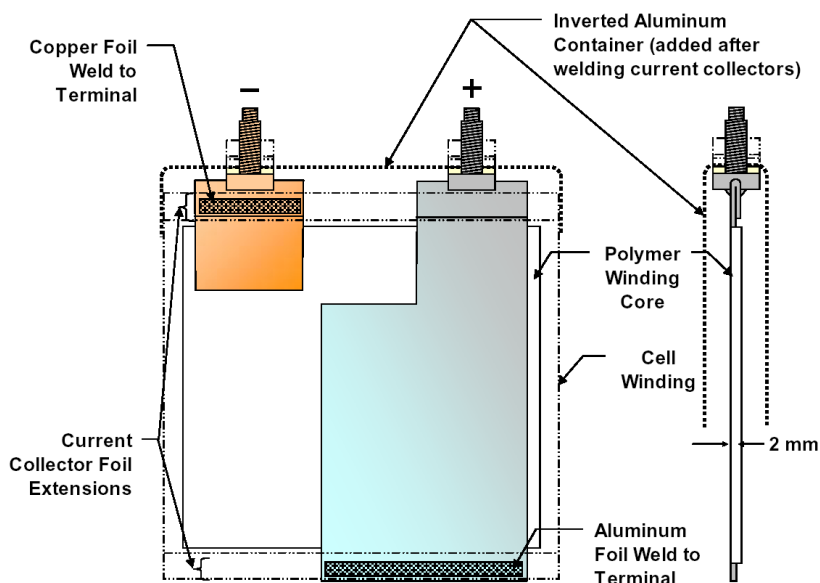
Terminal/Core Assembly for Rigid Aluminum Container.
